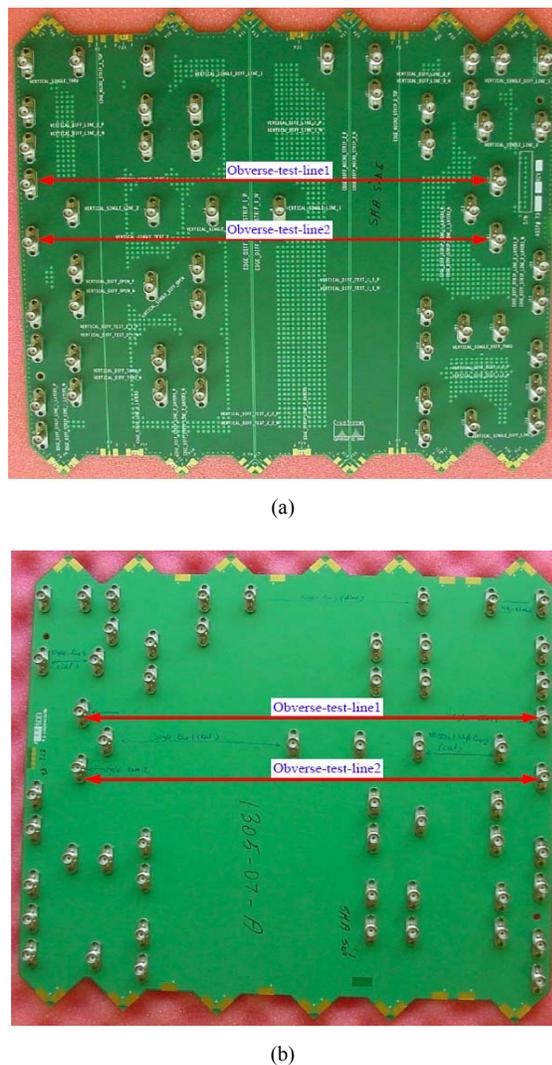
A test board: a) Top view of one test board. b) Bottom view of the test board.
